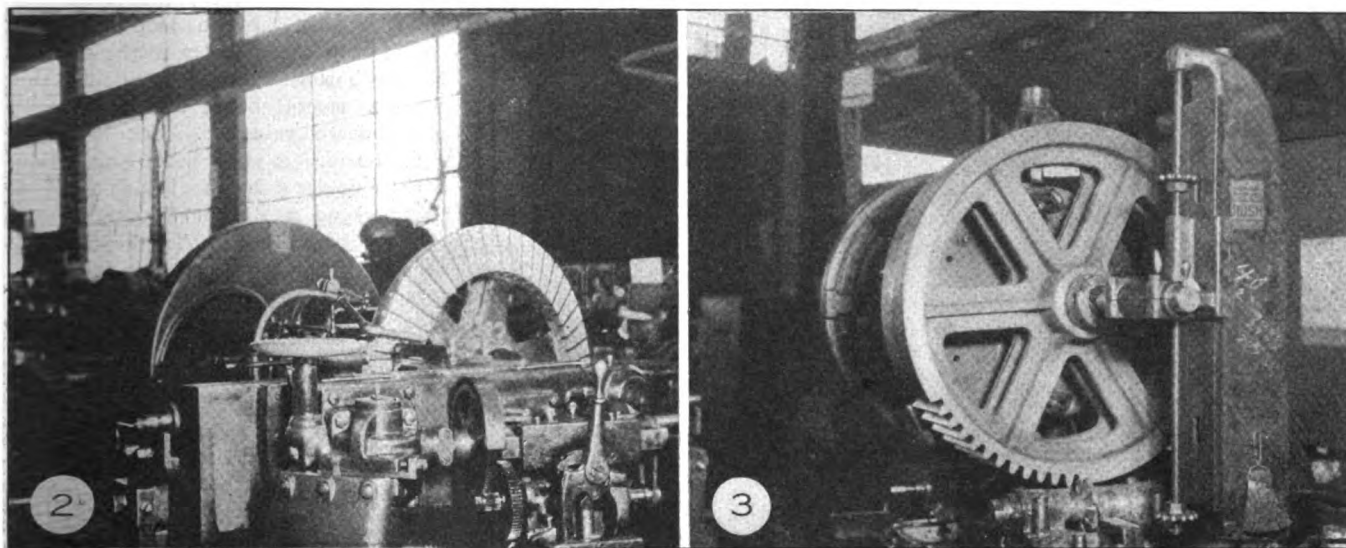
LARGE BEVEL GEARS ARE GENERATED ON A GLEASON GEAR PLANNER—FIG. 3 SHOWS THE CUTTING OF TWO LARGE SPUR GEARS ON A NEWARK AUTOMATIC GEAR CUTTER
